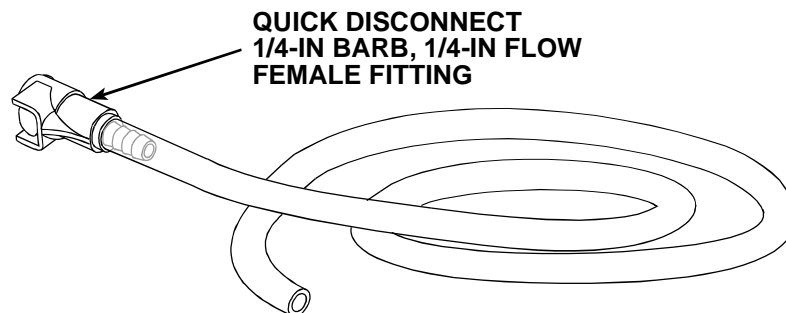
Ink PH Return Tubing Assembly (9600-783)
